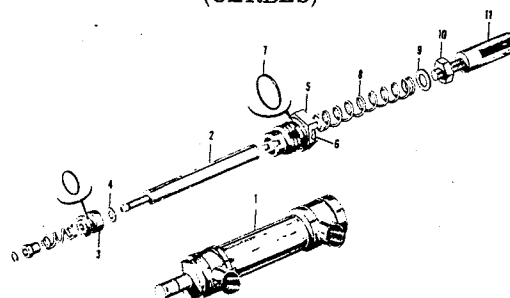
MASTER CYLINDERS AND PARKING BRAKE ASSEMBLIES
